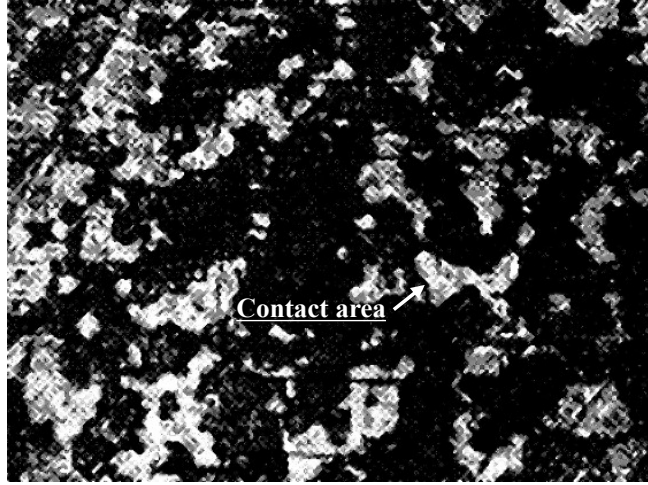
Photograph of flange surface after deep drawing ¹⁻³²⁾
